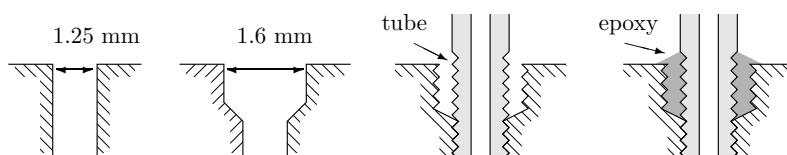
Mounting a tube perpendicular to the plane. First two holes are drilled. Then a 1.6 and 2.0 mm threading is made. The teflon tube, which is softer than PMMA, can be screwed into place without any thread. Finally, epoxy is applied for sealing purposes. The junction has been successfully tested leakproof to more than 7 bar.
